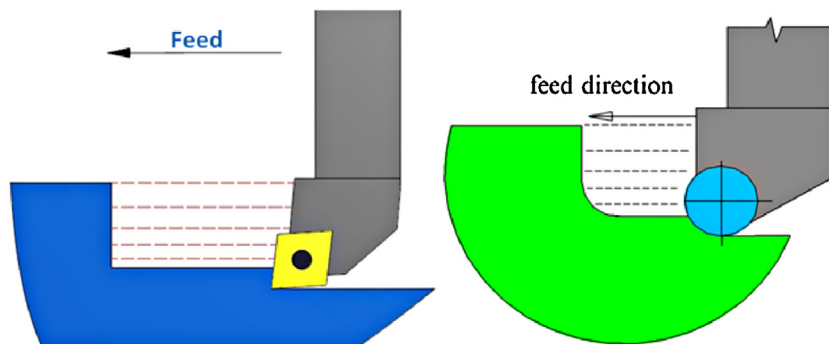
Tool paths – decreased cut with two types of insert (ramping).
